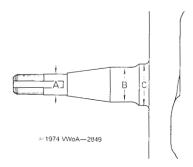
Stub axle measuring points. Dimensions are given in preceding text.
